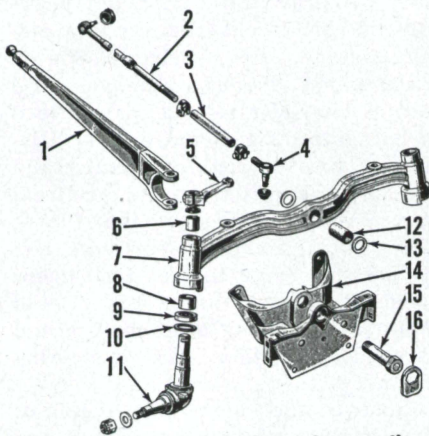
Exploded view of non-adjustable front axle and associated parts used on Utility Industrial and Grove tractors.
